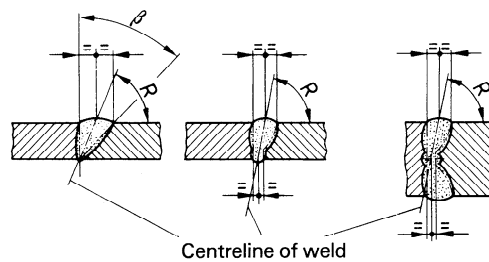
Examples of rotation,  $R$ , of asymmetrical butt welds with horizontal workpiece surface
